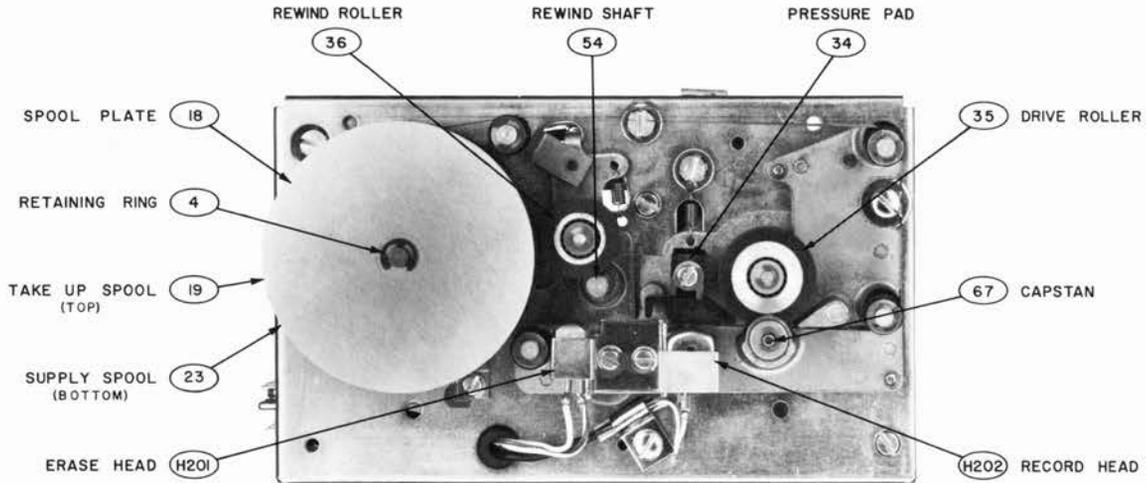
TAPE DECK FRONT VIEW, COVER REMOVED
